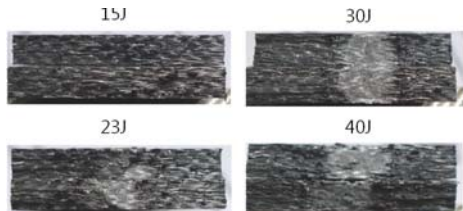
Fracture surface with impact energy¹⁰
